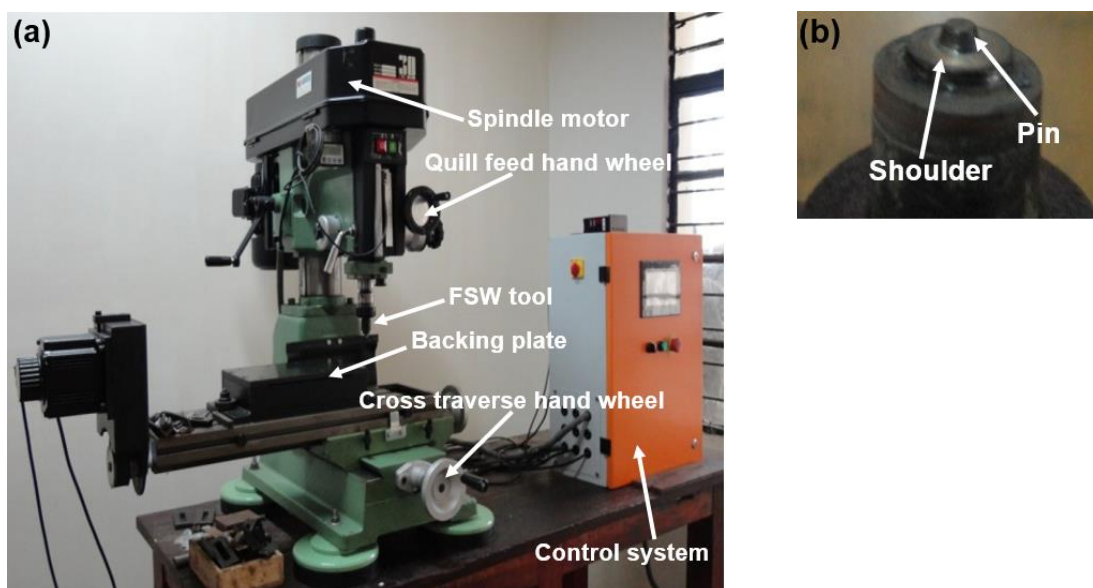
(a) A numerical controlled FSW machine; (b) W-1% Lanthanum alloy tool
